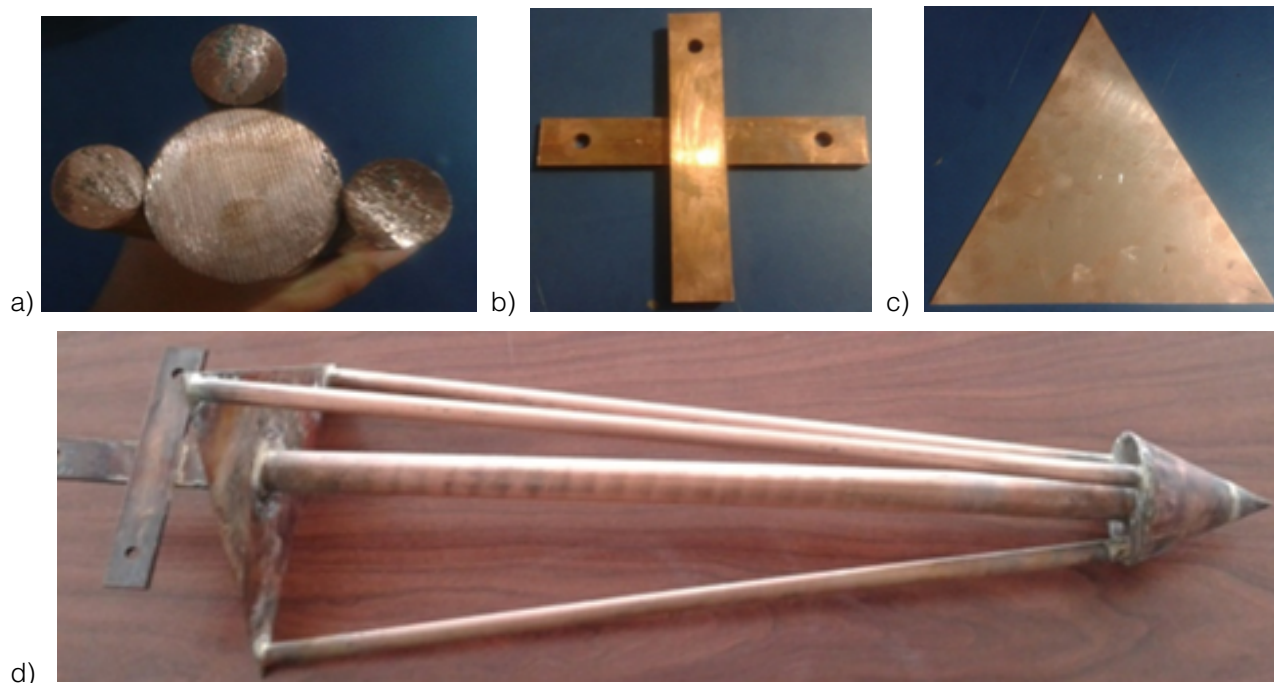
Body and final assembly of the prototype: (a) arrangement of the four solid copper rods; (b) perforated copper connectors and cross-shaped piece; (c) equilateral triangular copper plate; (d) fully assembled prototype electrode.
